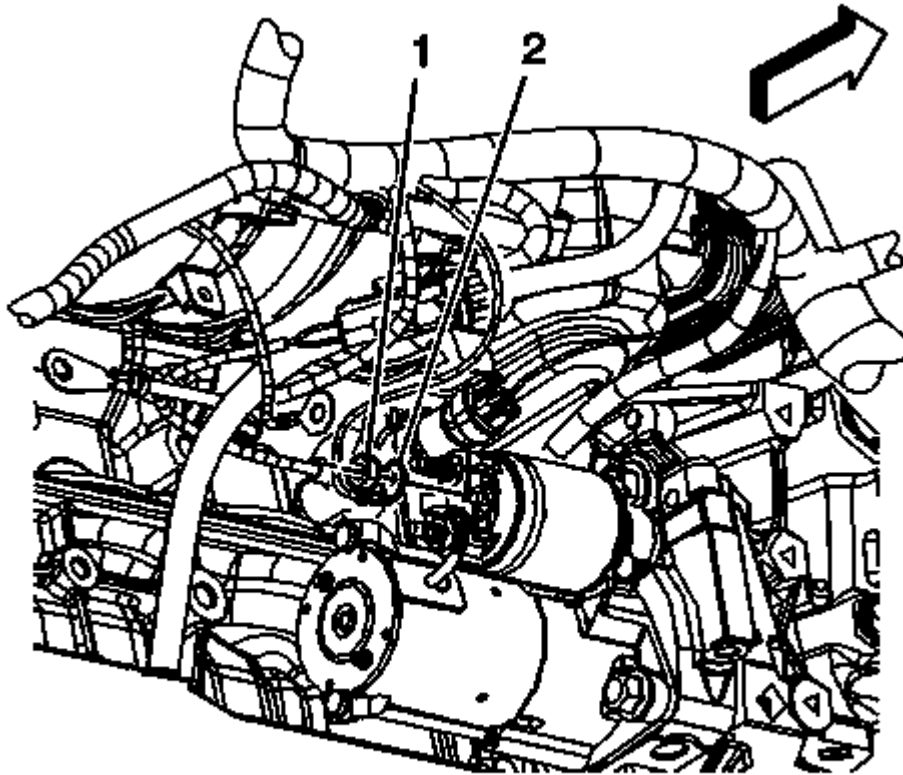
Identifying Starter Solenoid Engine Harness & Nut
